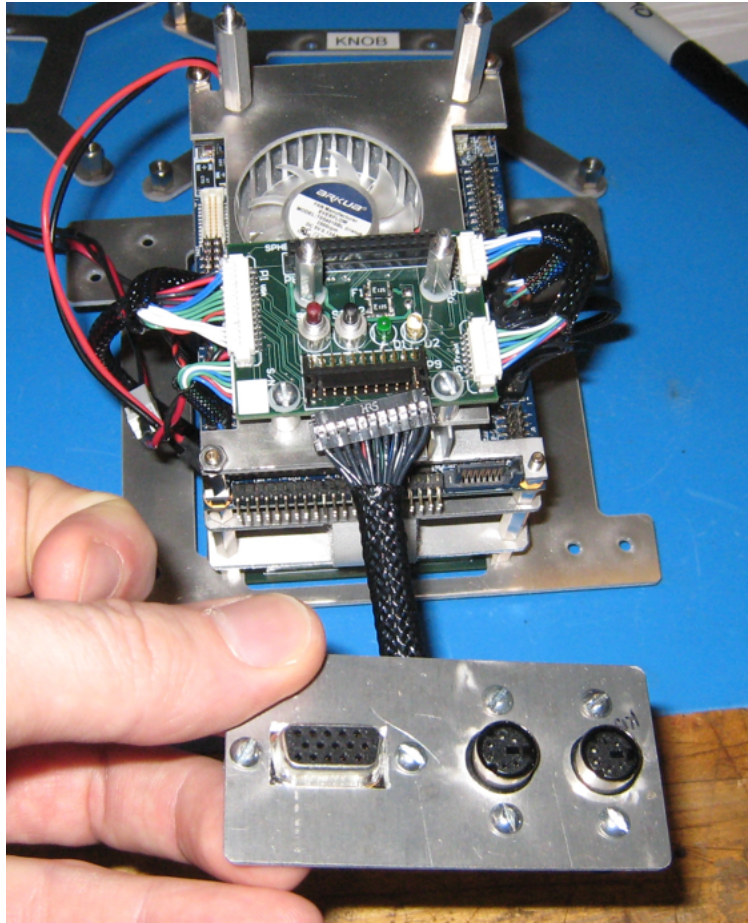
Optics PCB with VGA, Keyboard and Mouse Connector
